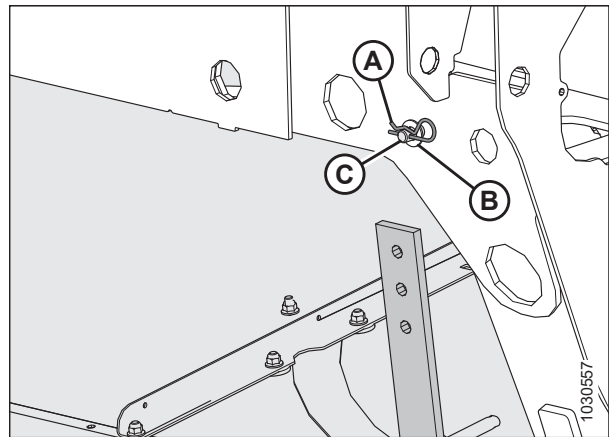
Lynch Pin and Washer at Rear of Windrower Leg
